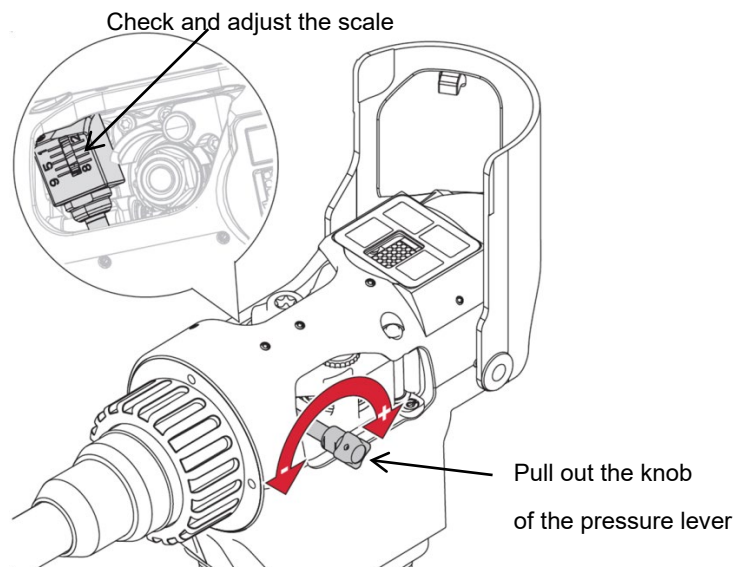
(a) Pressure adjustment of the Robacta drive roller
